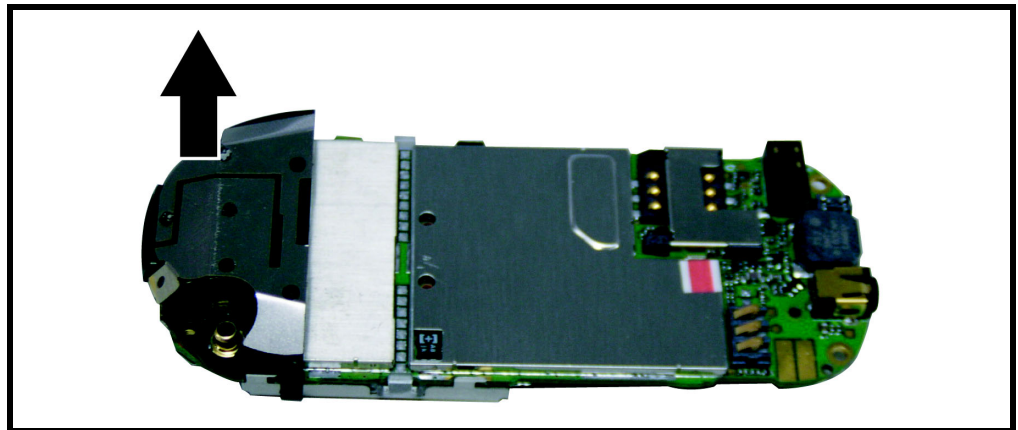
Gently pry up the vibrator motor on the inside of the back housing
